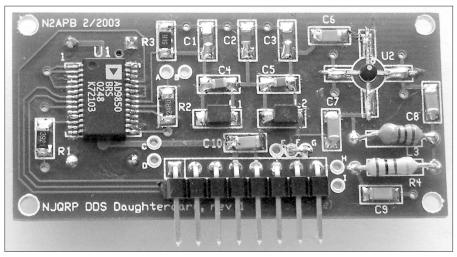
C — The fully-populated DDS Daughtercard PC board contains a mix of SMT and through-hole parts, showing how both packaging technologies can be used together.
